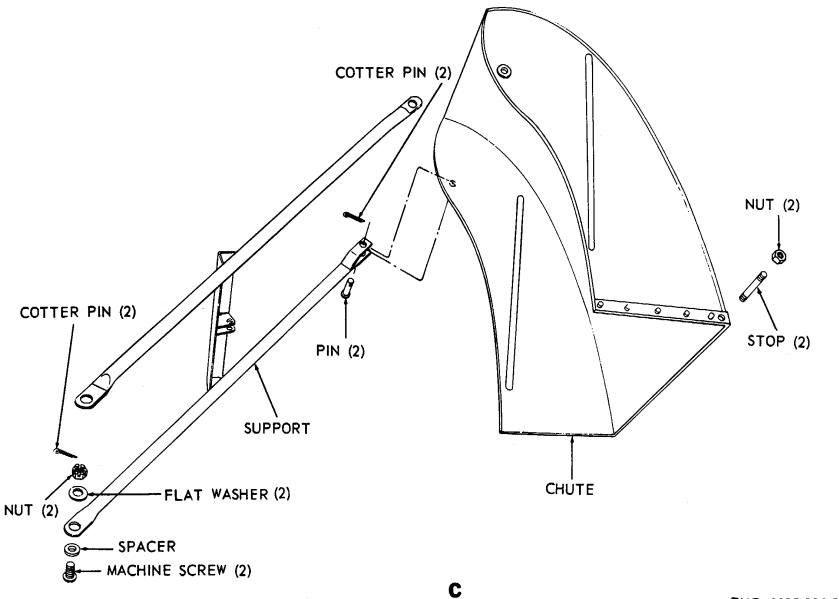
Chute trough assembly, disassembly and reassembly, exploded view.
